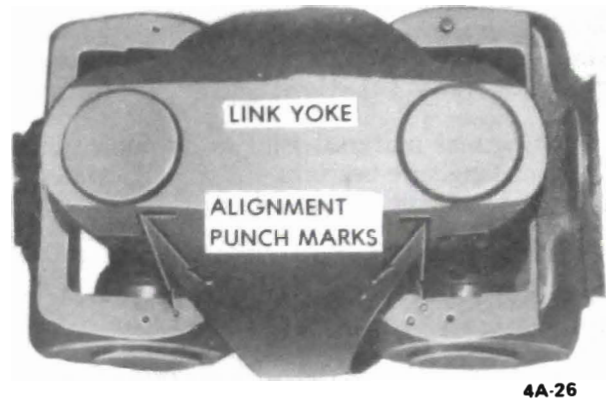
A-26 Link Yoke Showing Alignment Punch Marks
